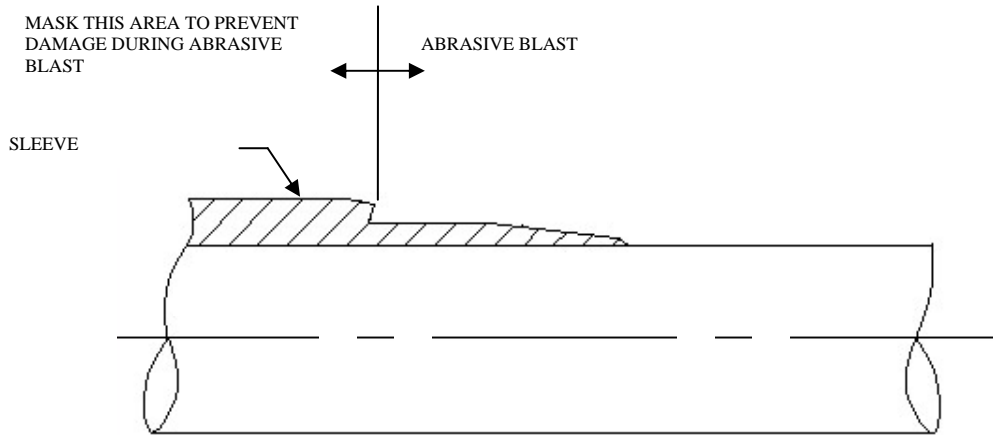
A typical shaft and sleeve configuration, prepped for the shaft covering.
